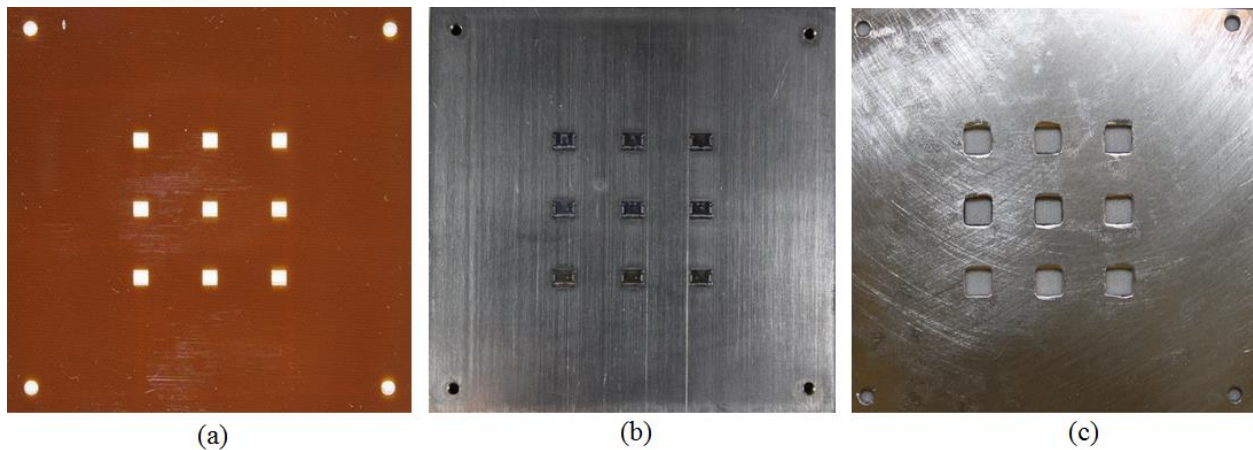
(a) Kapton mask, (b) bottom Aluminum fixture with cavity, (c) top Aluminum fixture with device cutouts for thin film deposition on Anode of SiC Schottky barrier diodes
